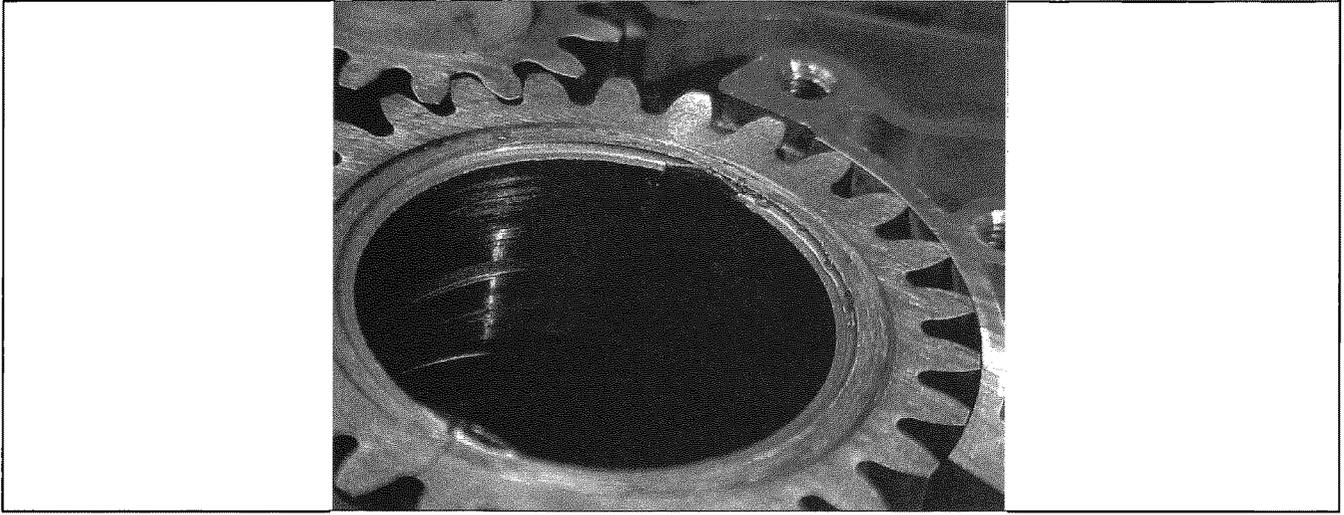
Pump Drive Gear Sheared (Converter Not Properly Aligned)
